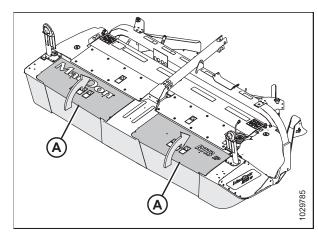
Cutterbar Doors and Curtains – R113 SP Shown, R116 SP Similar
